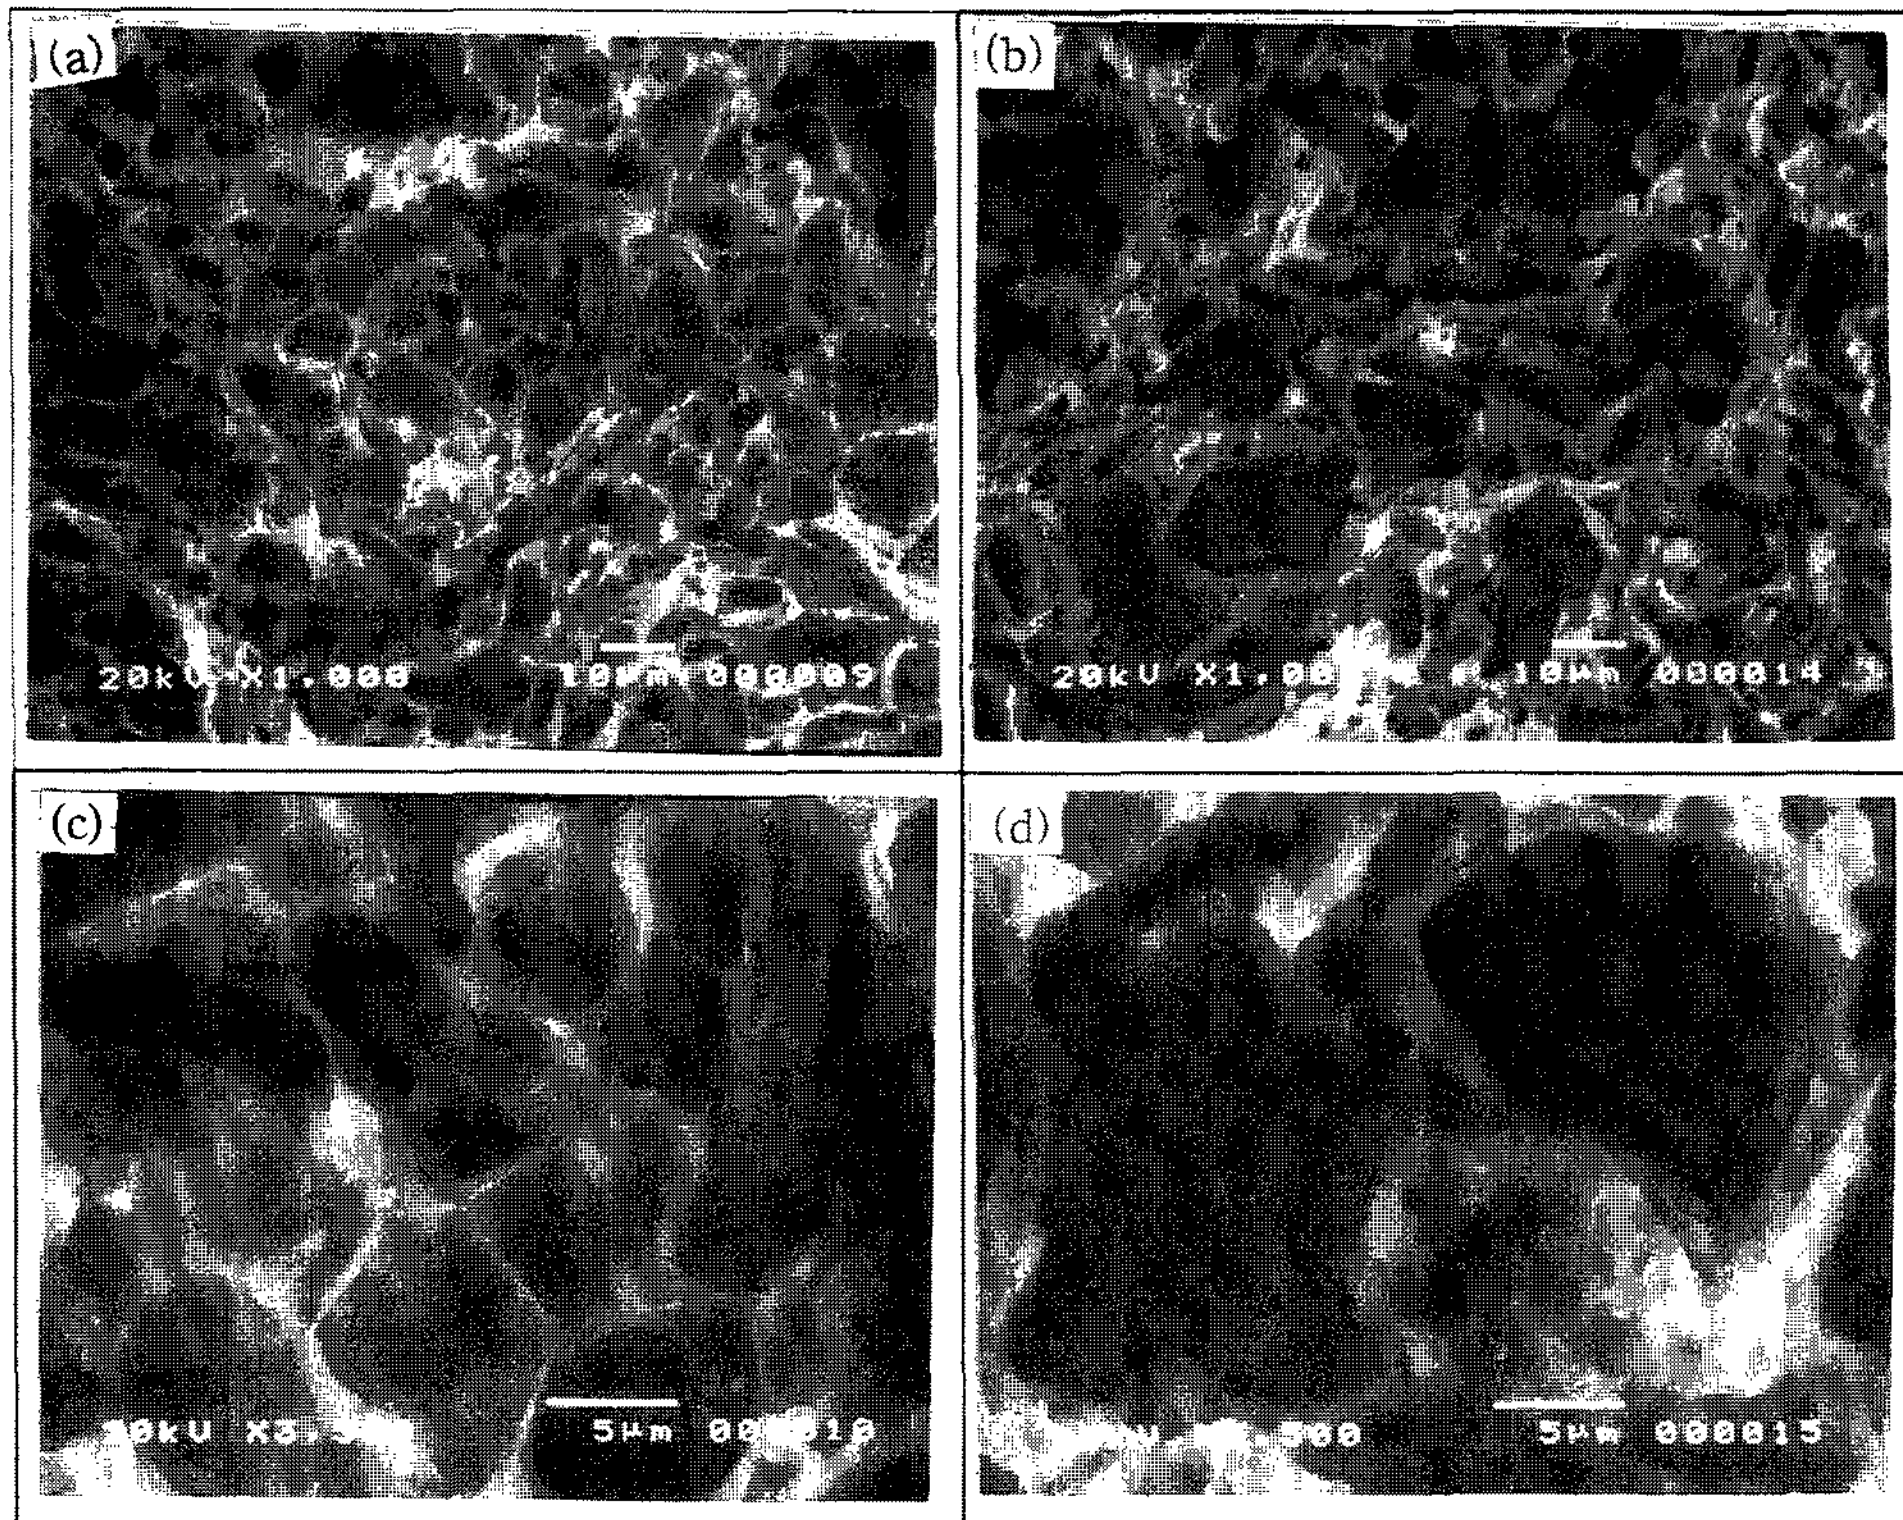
SEM fractographs of squeeze cast Al matrix composites tested at 300°C.
